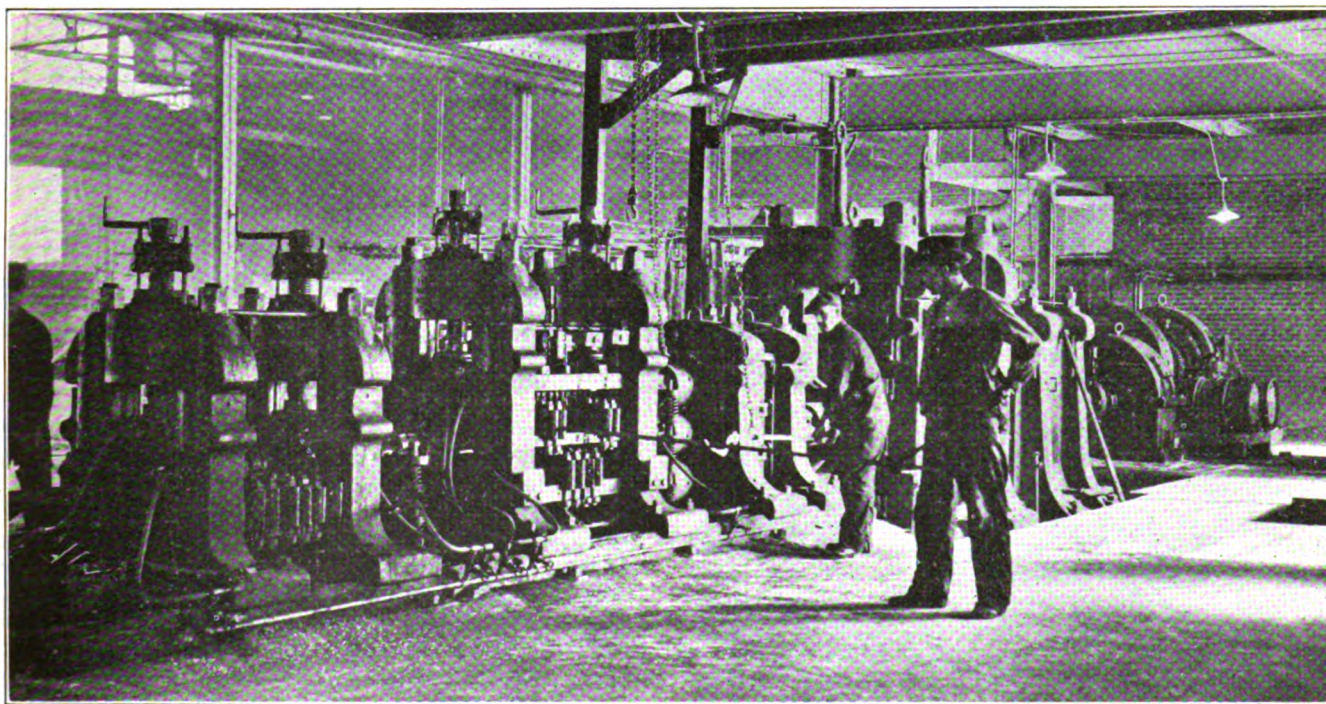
Shows an excellent view of the 12-in.—18-in. bar mill.
